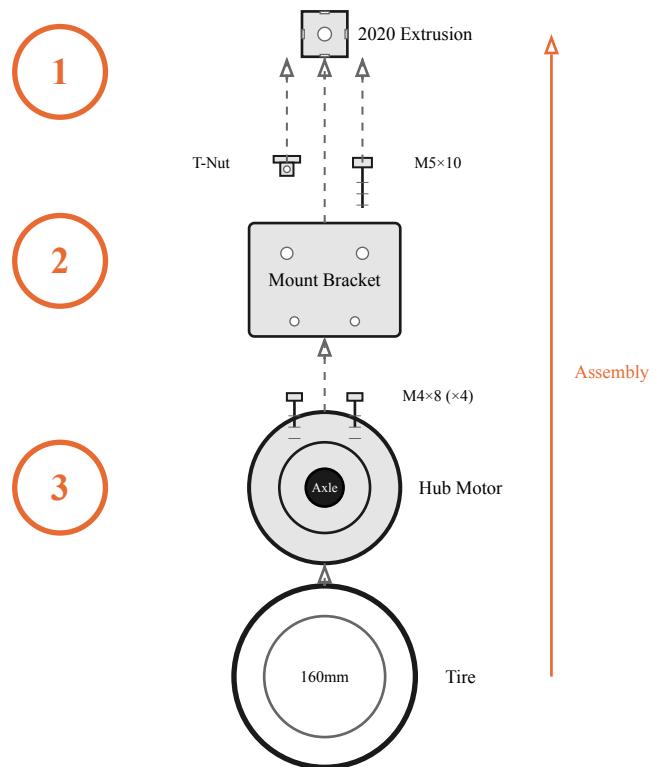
Exploded view: (1) Insert T-nuts into extrusion, (2) Bolt bracket to frame, (3) Attach motor and tire
